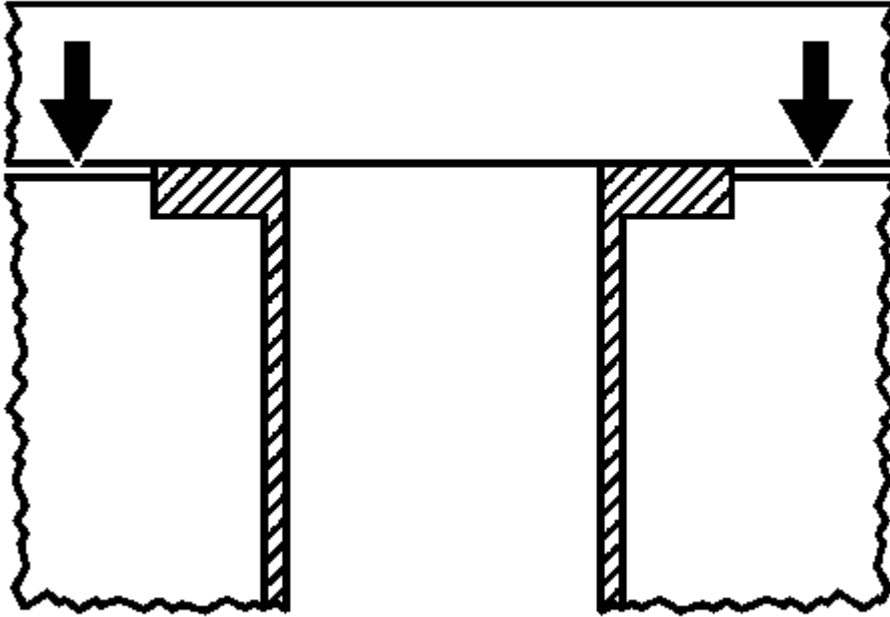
View Of For Properly Cut Cylinder Bore Sleeve
